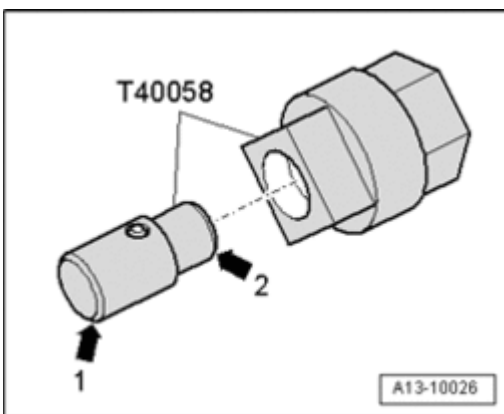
Inserting Guide Pin Of Adapter T40058 So Small Diameter Points To Engine
